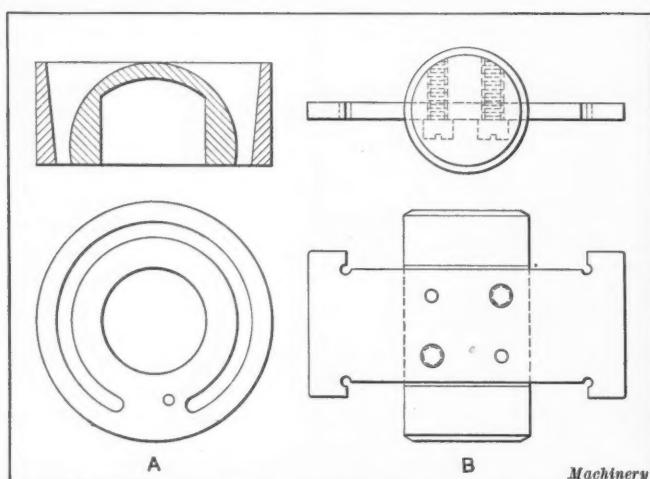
(A) Special Funnel used for loading Fuse Rings. (B) Concentricity Gage for Fuse Rings.
